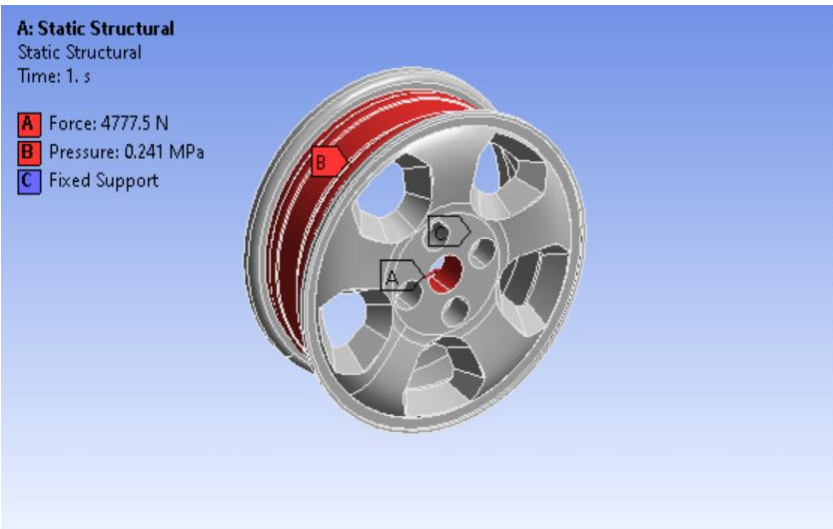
Initial conditions and constraints. (A) Fixed support on the wheel hub; (B) pressure load on the rim and spokes; (C) torque applied on bolt hole surfaces.
